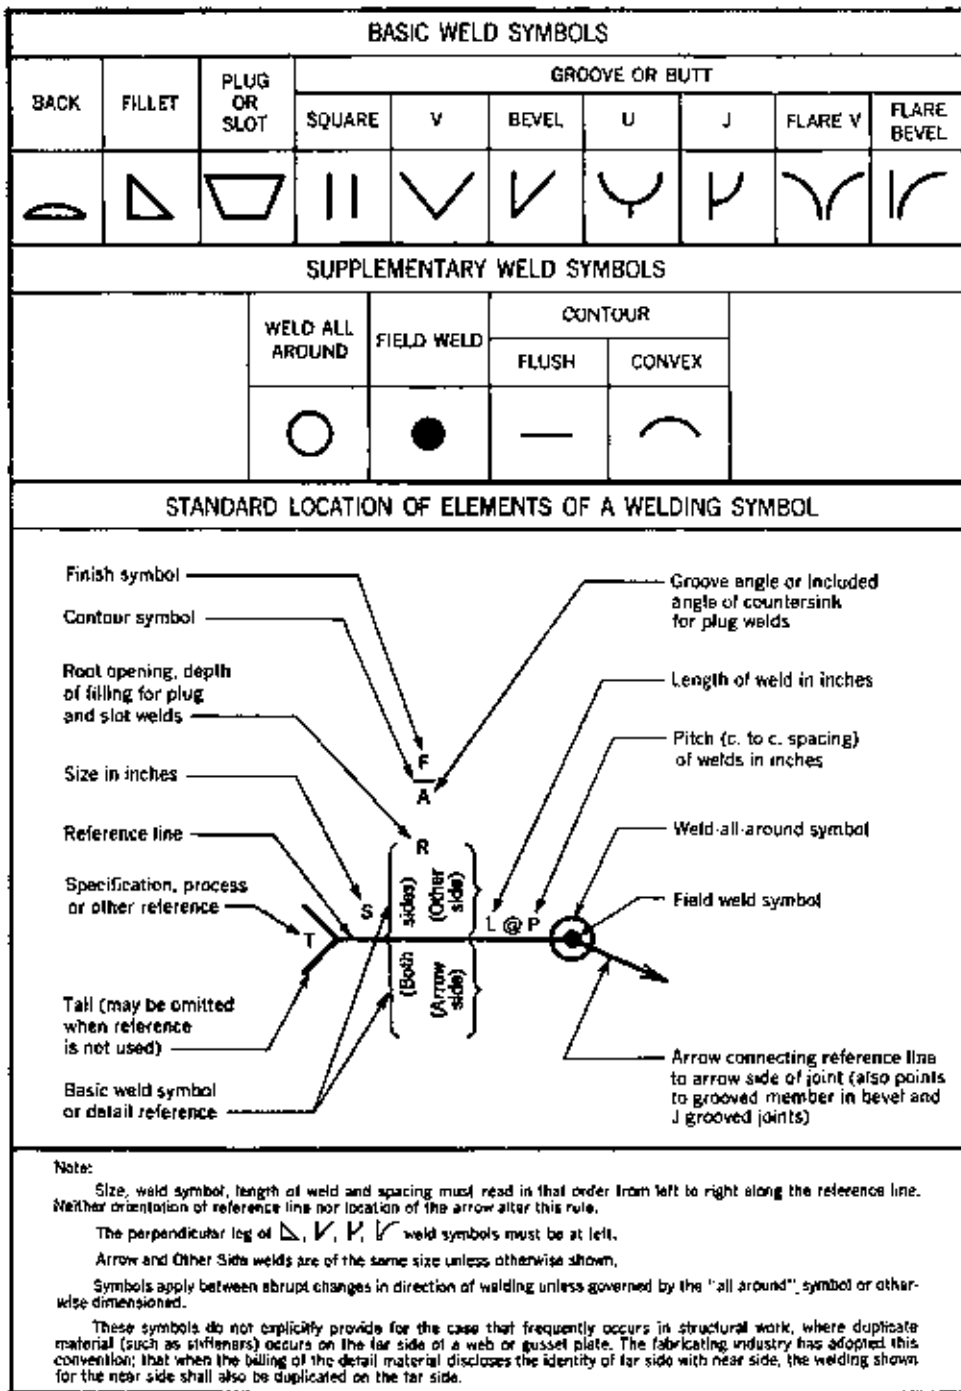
Standard welding symbols. (Courtesy of American Institute of Steel Construction)
